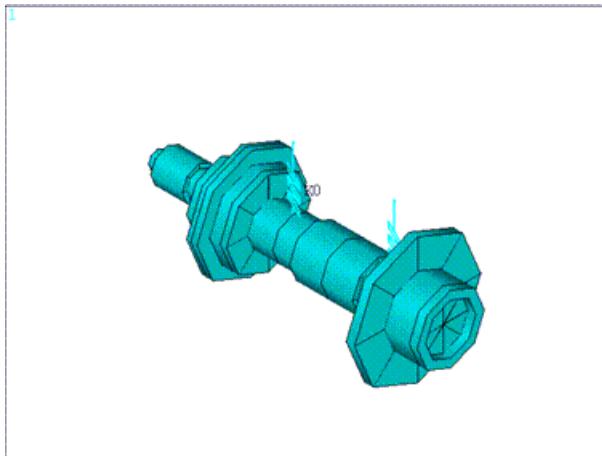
Isometric View of the Rotor-Bearing SystemTable 254.1: Geometric Data of Rotor-Bearing Elements
